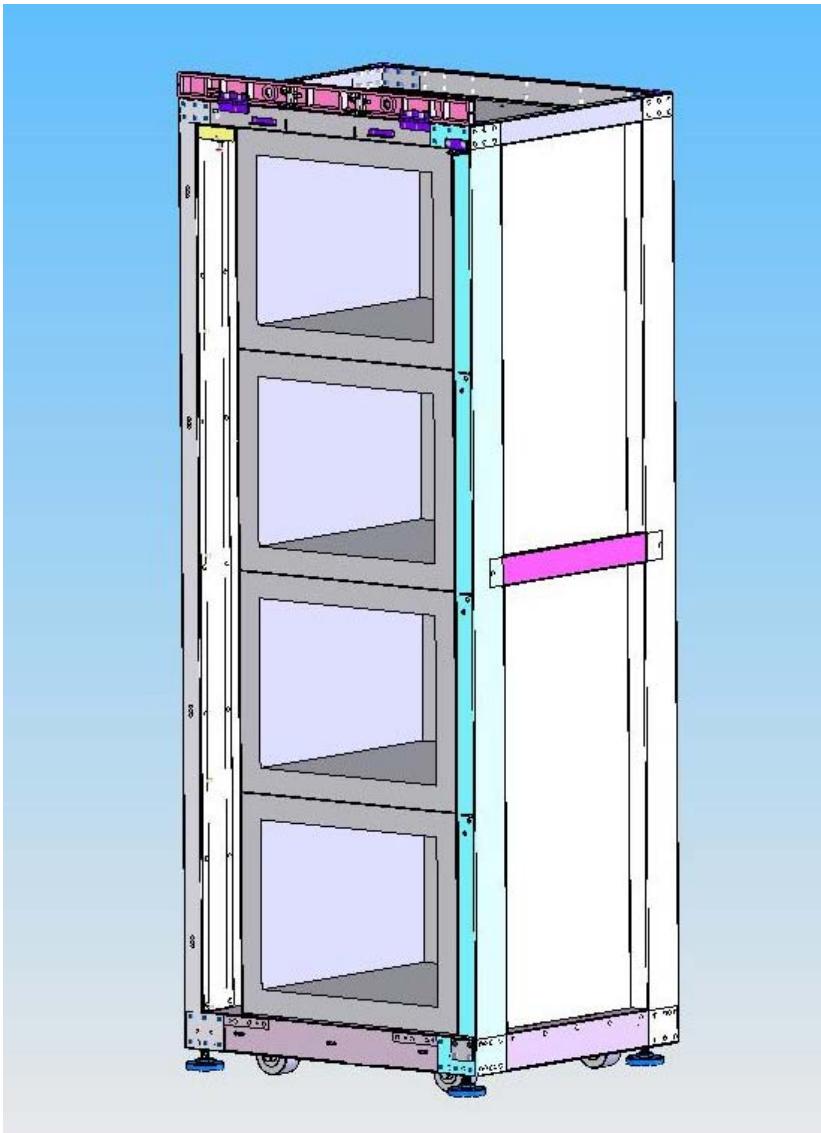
Aux cabinet with stack of four antenna assemblies installed, doors removed for clarity
